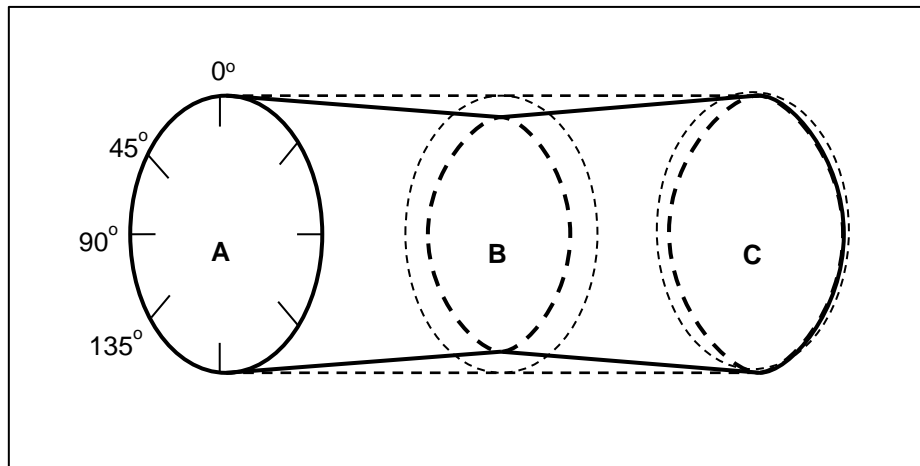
Roller Bearing Reliability Compromised by the Shaft Condition
